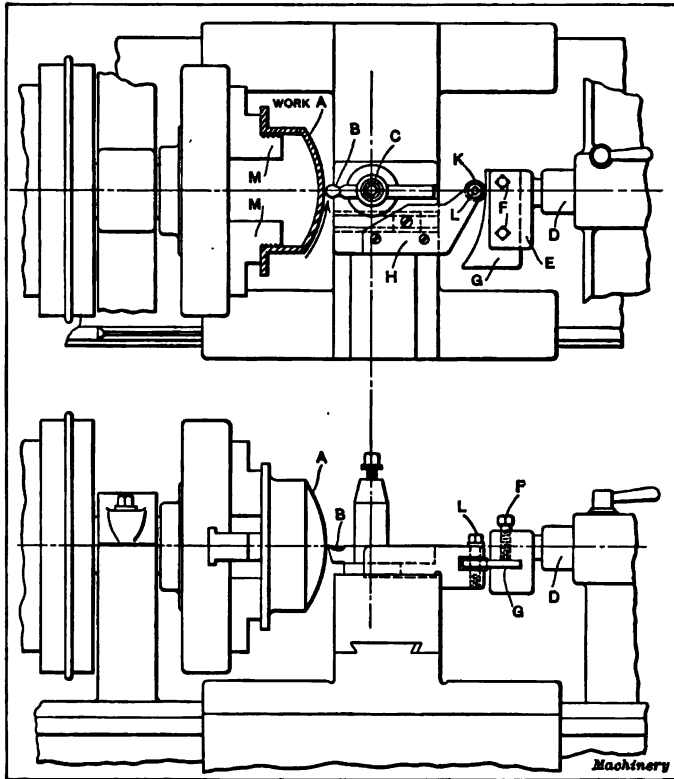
Simple Attachment for Convex Turning in Engine Lathe
